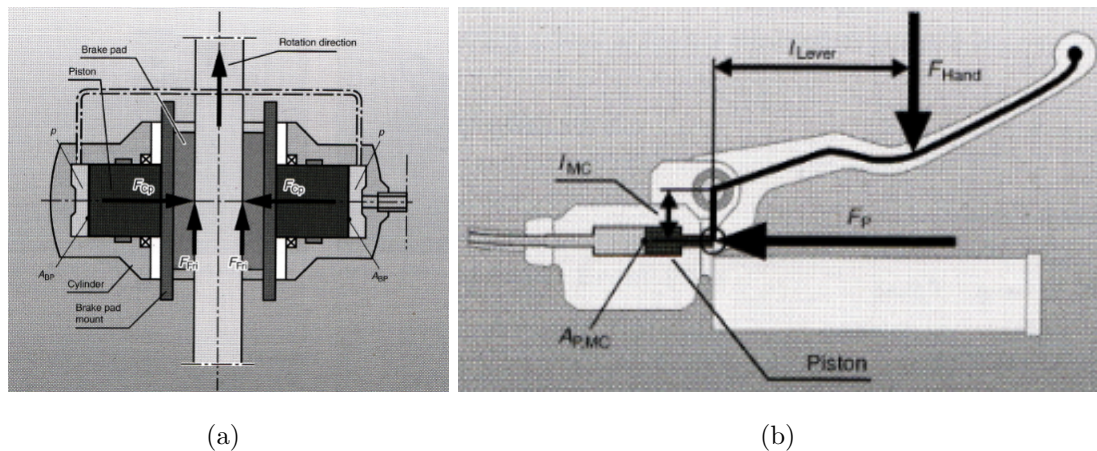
Cross section of a disc brake caliper with brake pads in contact with a brake rotor (a) and hydraulic brake lever (b). Friction forces and pressure forces are also shown. Source:[1]
